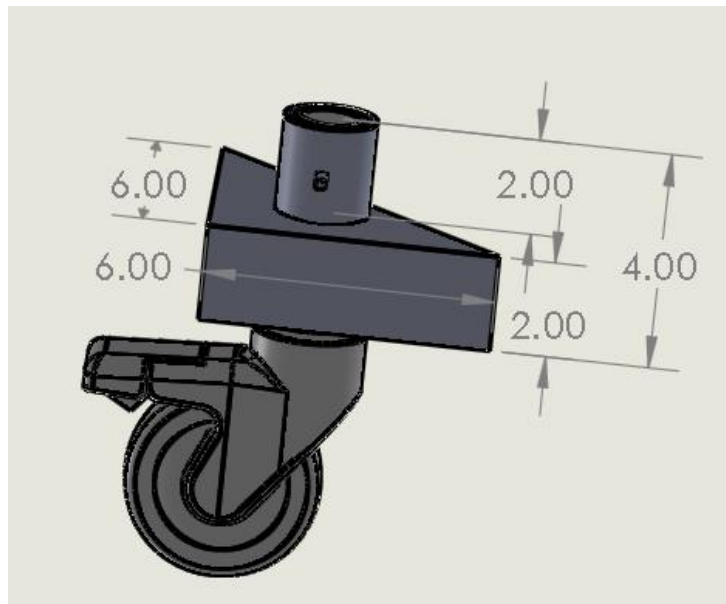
Foot and wheel assembly attachment utilizing a pin to secure the wheel to the foot. Dimensions in inches.
